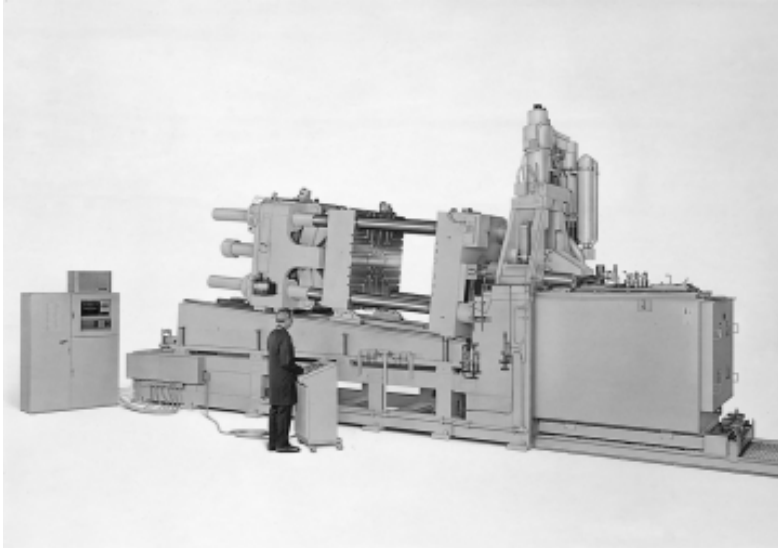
FRECH hot-chamber die-casting machine DAM 800 S
